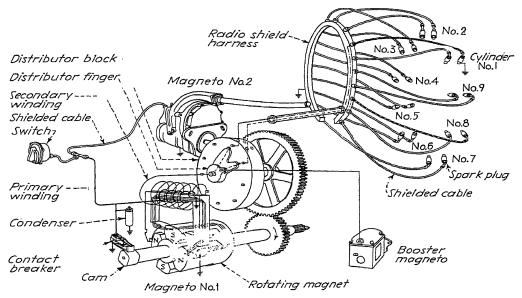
Typical aircraft magneto. (Courtesy of Bendix-Scintilla Mfg. Co.)
